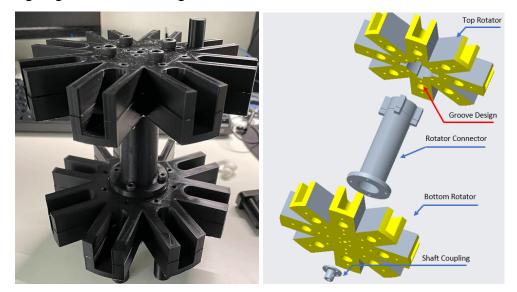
Mechanical Rotator System a.) Physical b.) CAD Illustration
